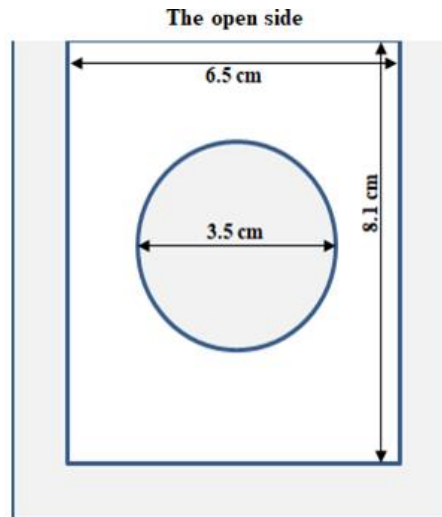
Illustration showing Aluminum polyethylene polyester cover dimensions.
